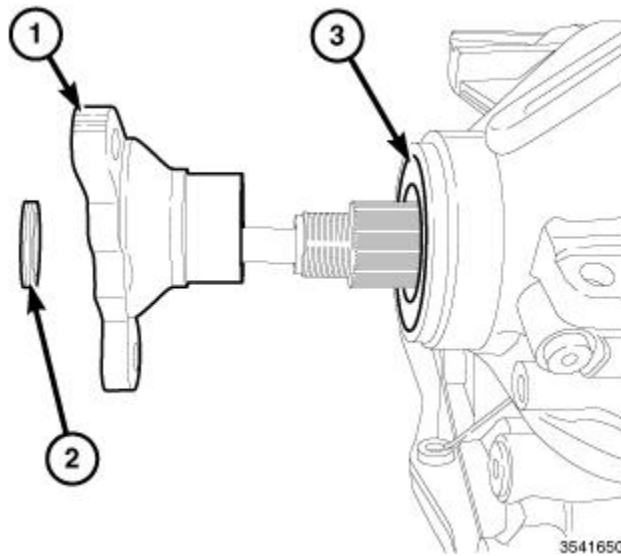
Propeller Shaft Flange, Rear Dust Seal & Rear Oil Seal
